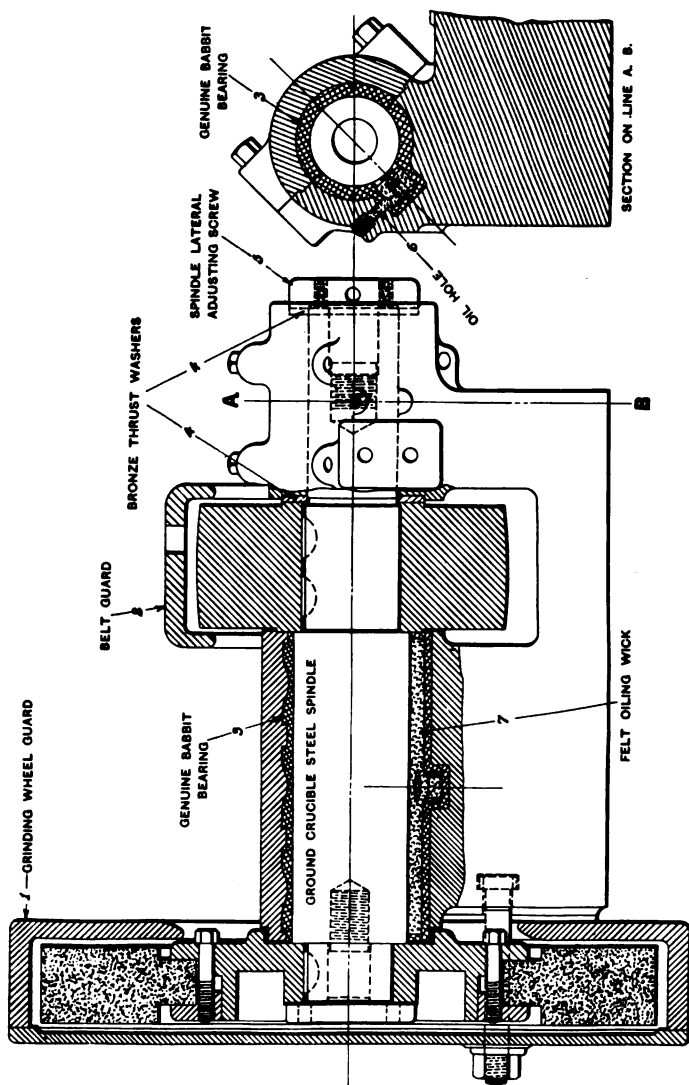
Section Through Grinding Wheel Spindle and Bearings—Plain Machines
